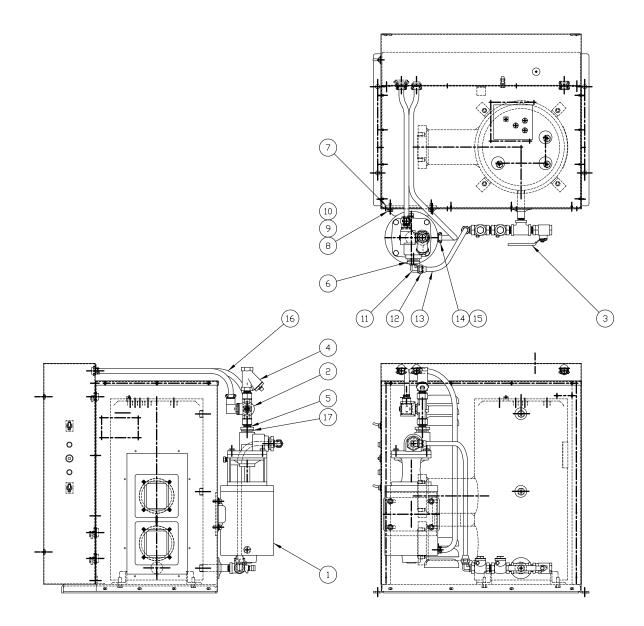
75285 (rev D) Electrical Enclosure Assembly – Hoffman Steam Generator
